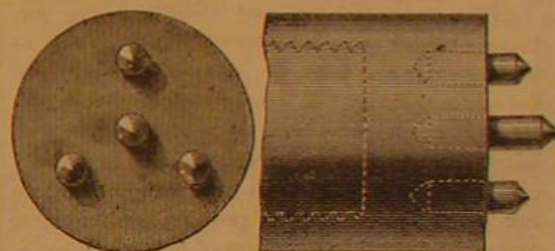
shows the face of the chuck with four points projecting. Fig. 2 shows a side view of the chuck.
